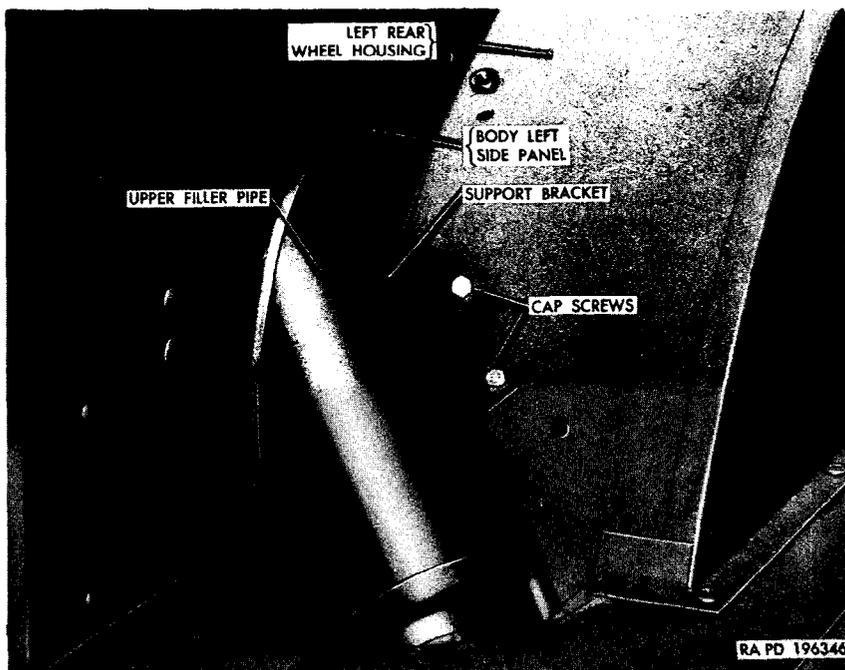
Upper fuel filler pipe (cargo truck M37 or command truck M42).
